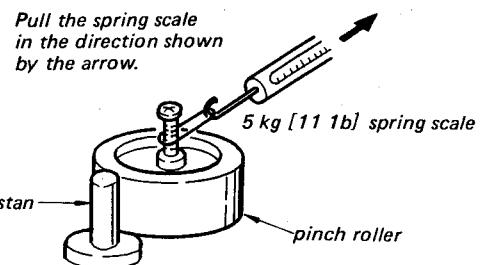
Pinch roller pressure adjustment (2)
